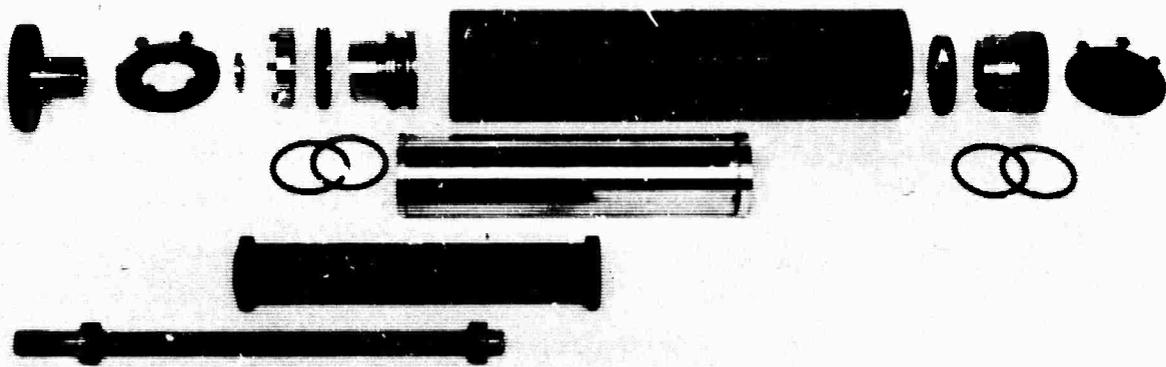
EXPLODED VIEW OF THE COMPONENTS
